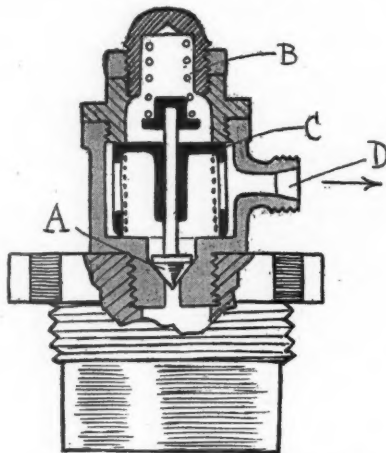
CROSSLEY FUEL-PRESSURE VALVE
